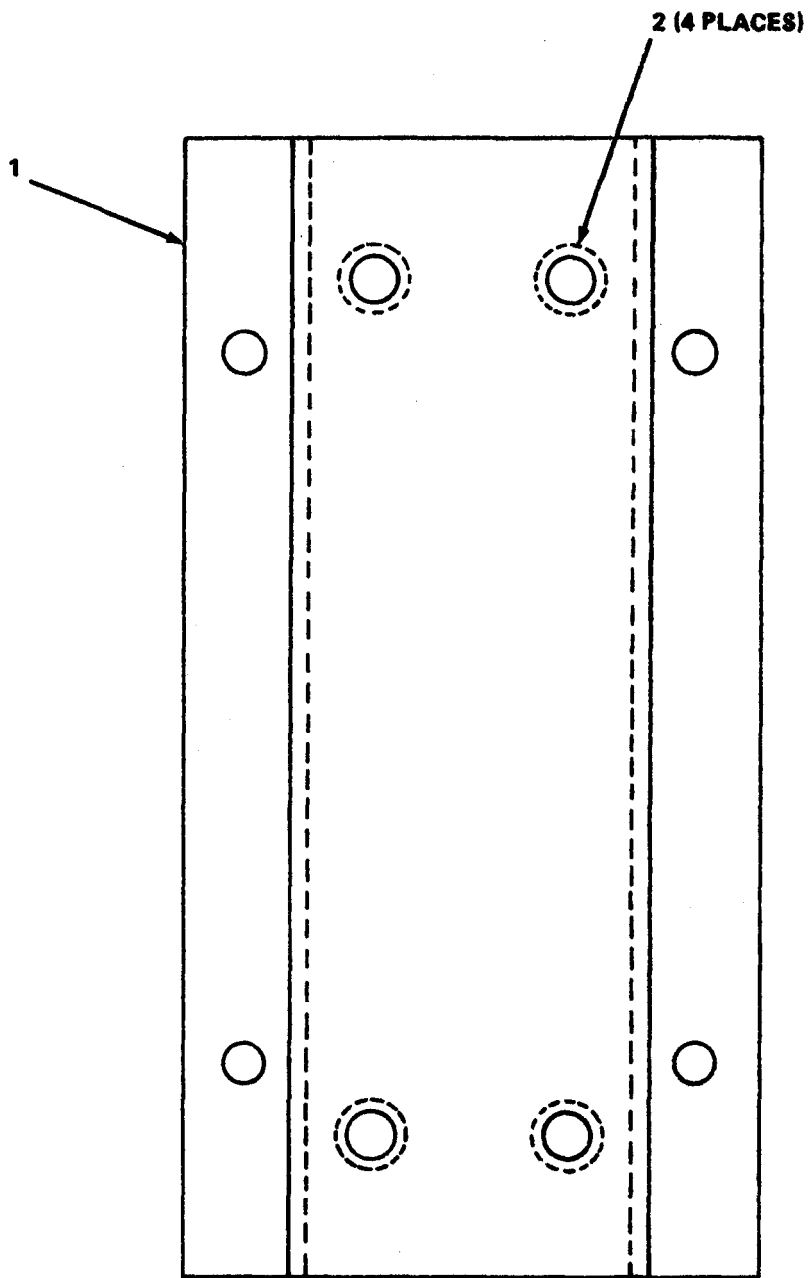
Fire Extinguisher Mounting Bracket Assembly
